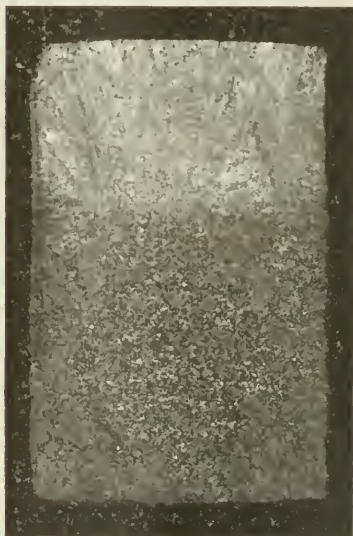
Good wheel mixture. 55 per cent. wheel scrap; 3.9 per cent. charcoal iron; .1 per cent. ferro-manganese. No ferro-manganese in ladle. Chill test of first tap.
